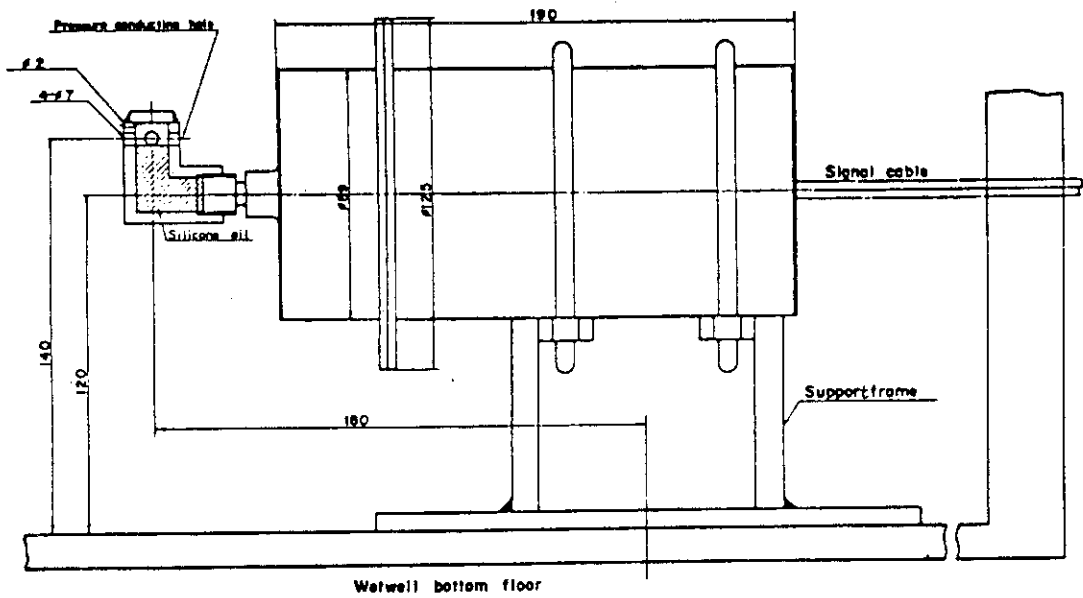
Schematic of installation of cavity type pressure transducers on wetwell bottom floor (as of before modifications)
